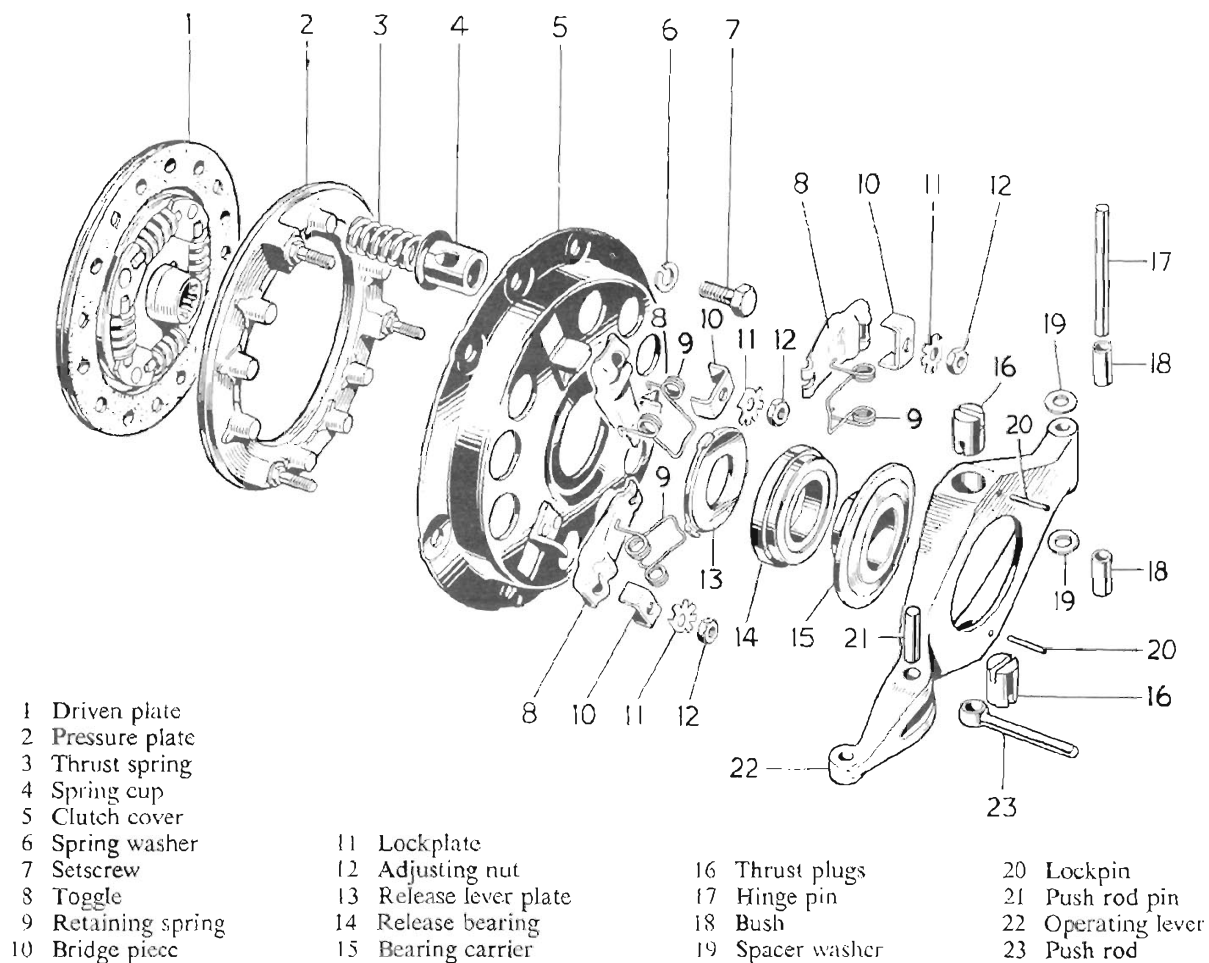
Exploded clutch unit (Herald 1200, 12/50 and Spitfire)
